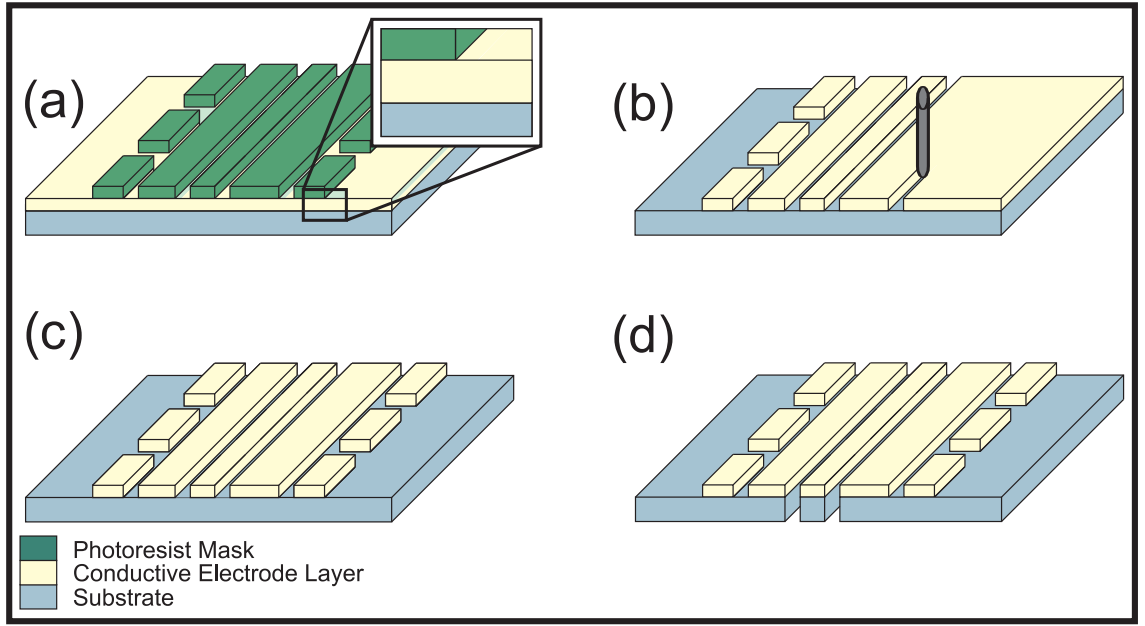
Overview of several PCB fabrication processes. (a) Deposition and exposure of the resist used as a mask in later etch steps. (b) Removal of the top copper layer using mechanical milling. (c) Removal of the copper layer using a chemical wet etch and later removal of the deposited mask. (d) Mechanical removal of the substrate underneath the trapping zone [192].
